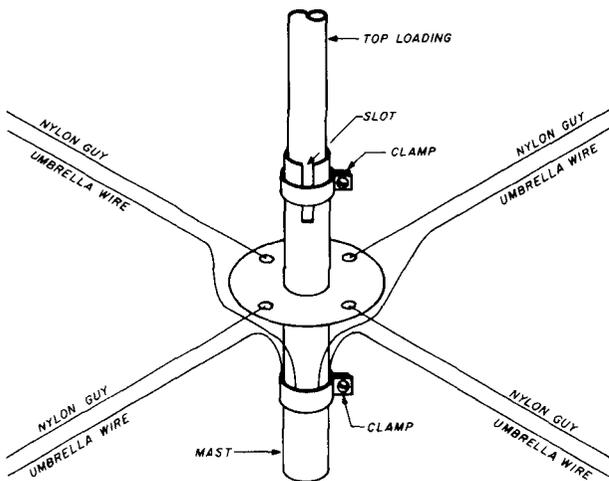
Detail showing attachment of top guys, "umbrella" wires and top loading whip.
